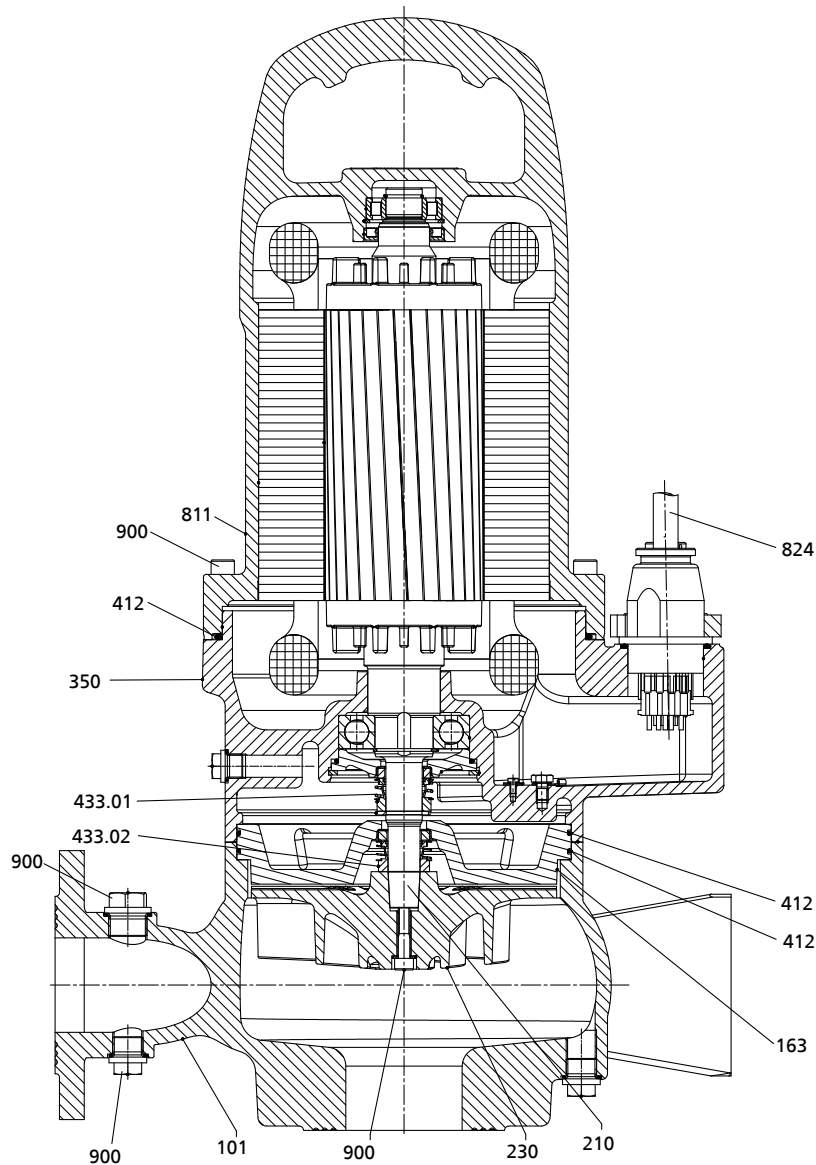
General assembly drawing, example: Amarex KRT F 65-215
